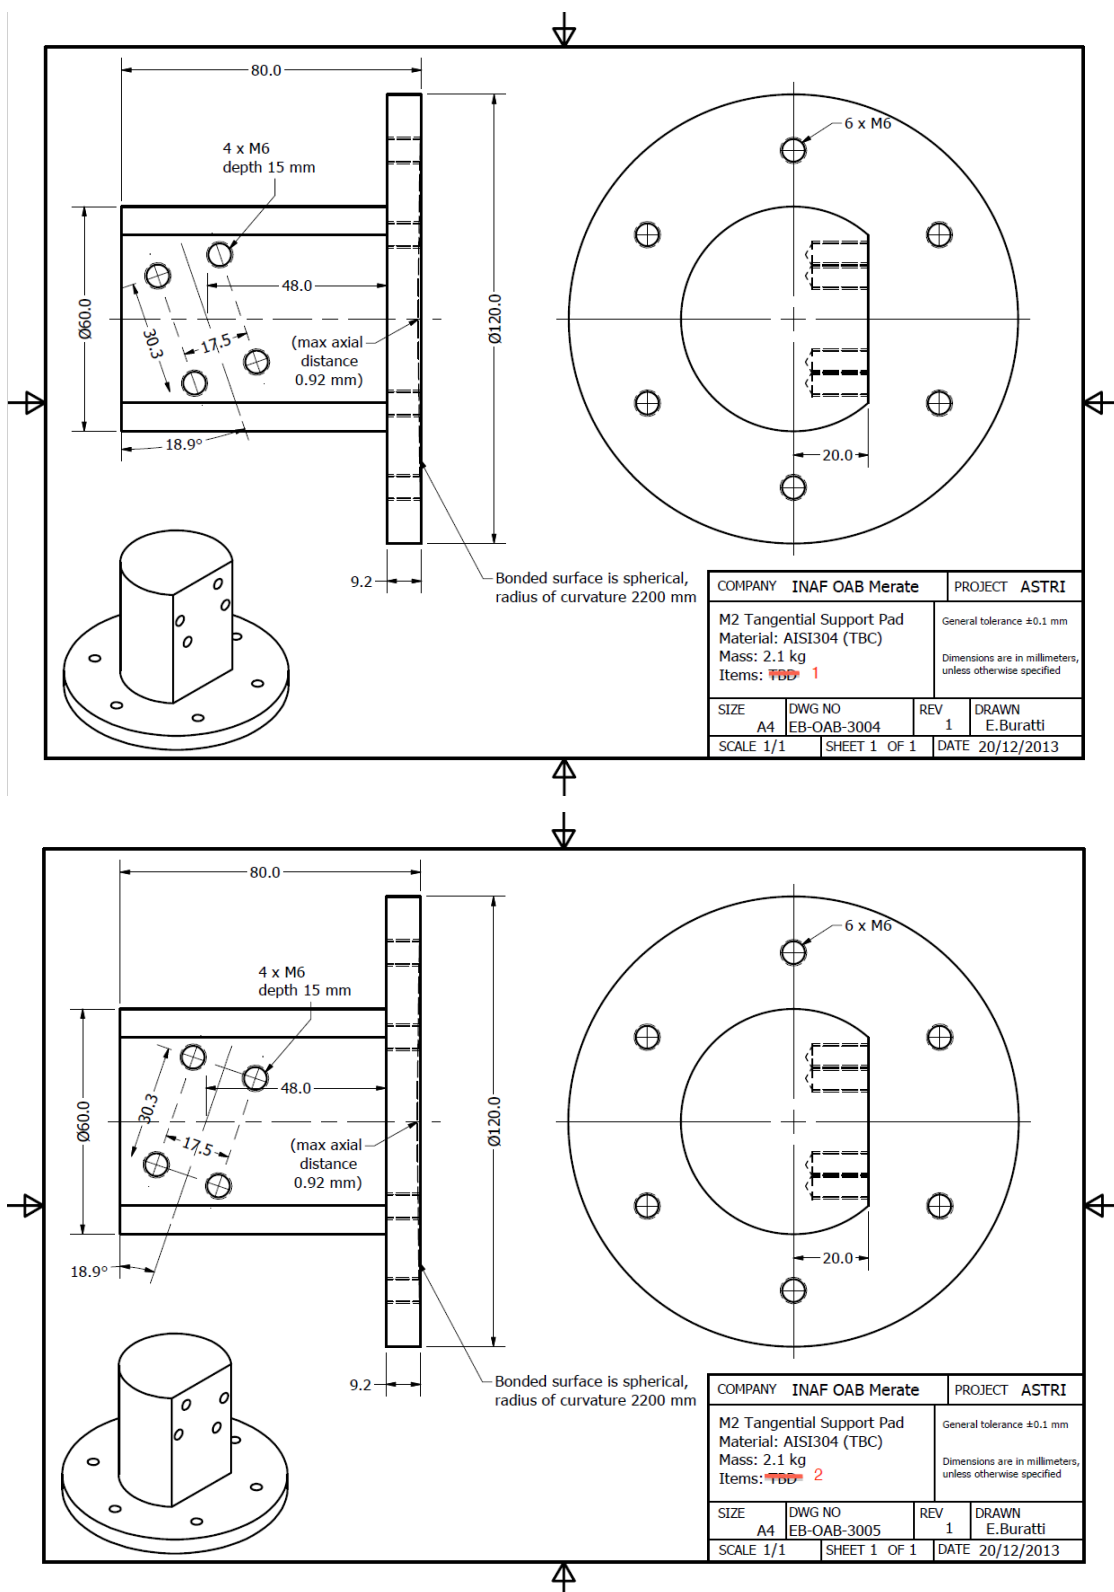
Mechanical drawings of the tangential support pads, ASTRI-INAF-DWG-7222.310-01 and ASTRI-INAF-DWG-7222.320-01 (formerly EB-OAB-3004 and EB-OAB-3005).
